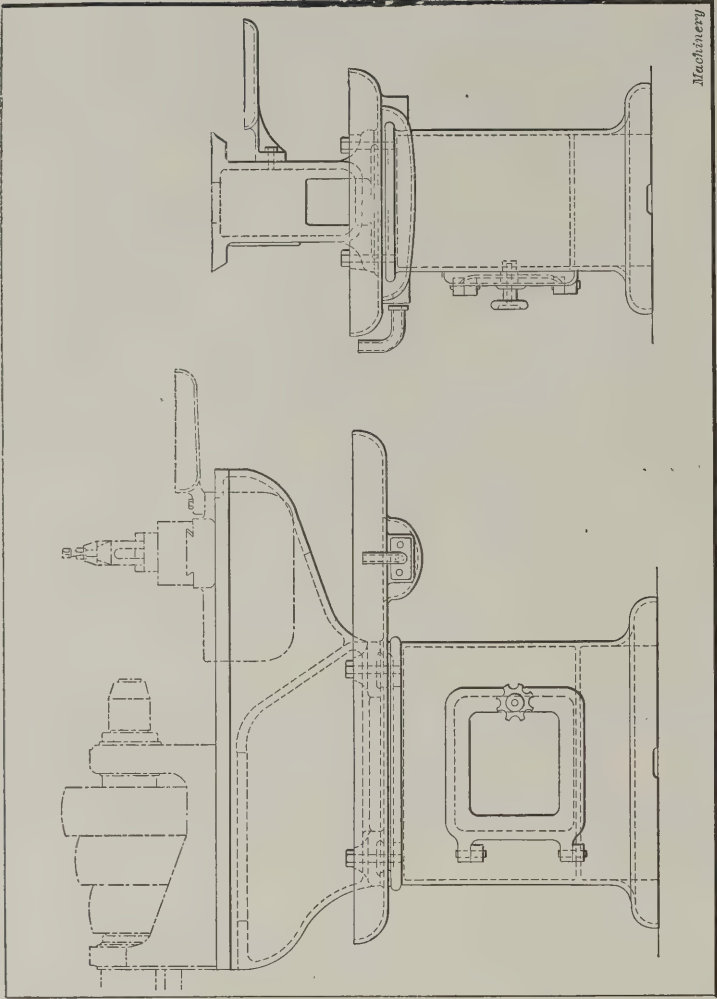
Bed for Shaving Lathe with Single Cabinet Standard
